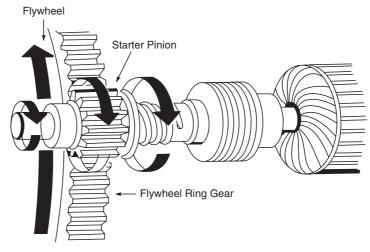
Pinion Meshes with Flywheel Ring Gear
